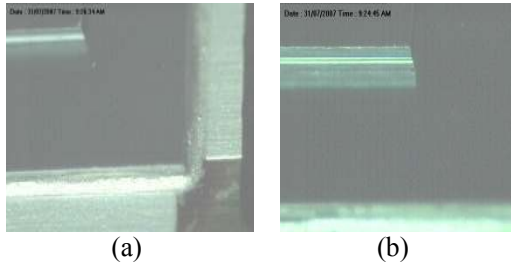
Fillet height, resin bleed and bond line thickness of the (a)epoxy and (b)DAF were in controlled.
